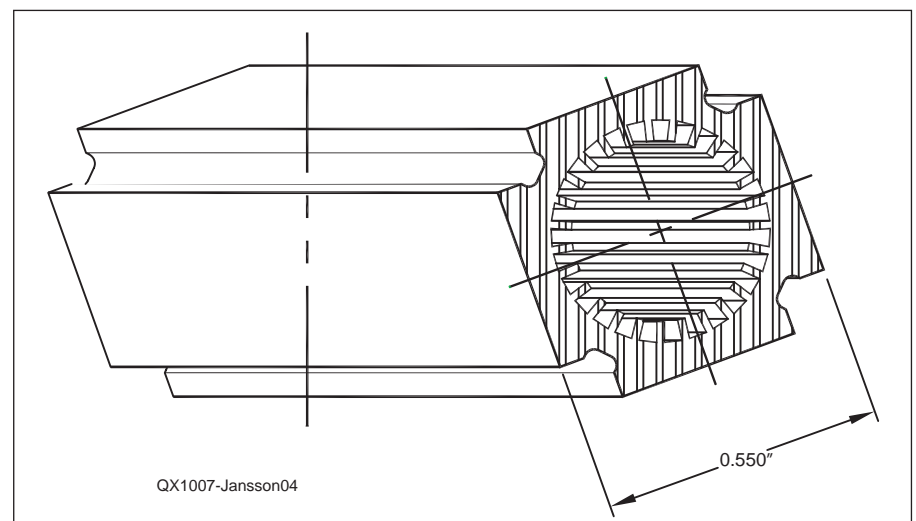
AO-40 heat pipe extrusion cross section. KD1K drawing
